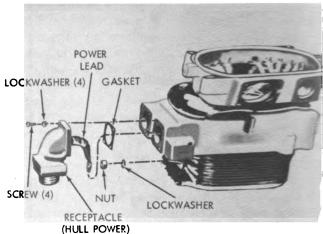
Slipring box disassembly or assembly (1 of 7).
